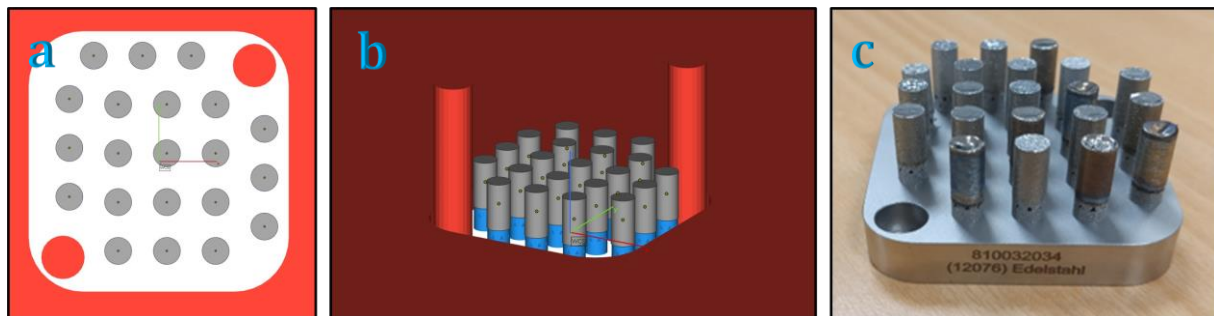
SLM Printed 21 cylindrical Samples with different parameters set. (a) Top view of CAD design, (b) 3D view of CAD design, and (c) Manufactured samples.
